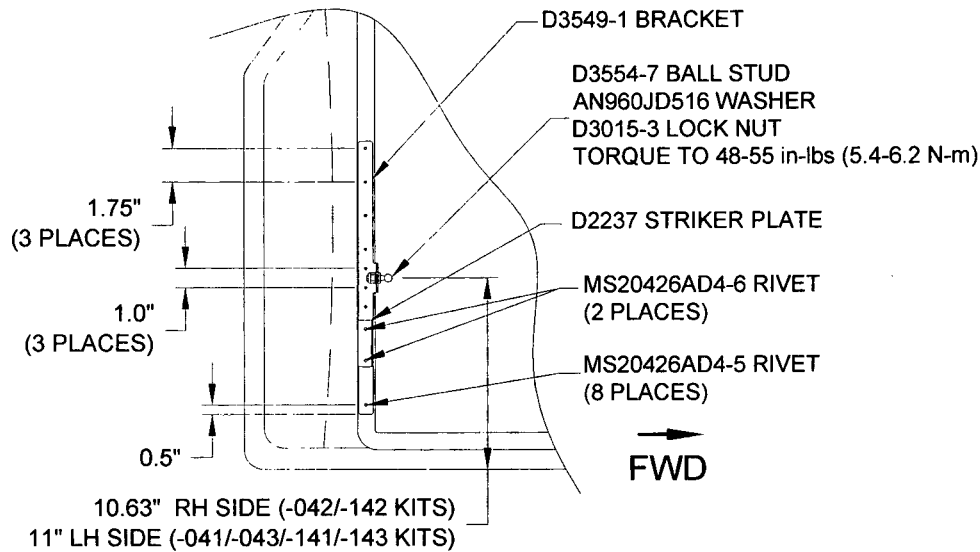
COMPONENT REMOVAL FROM EXISTING SPACEPOD DOOR
